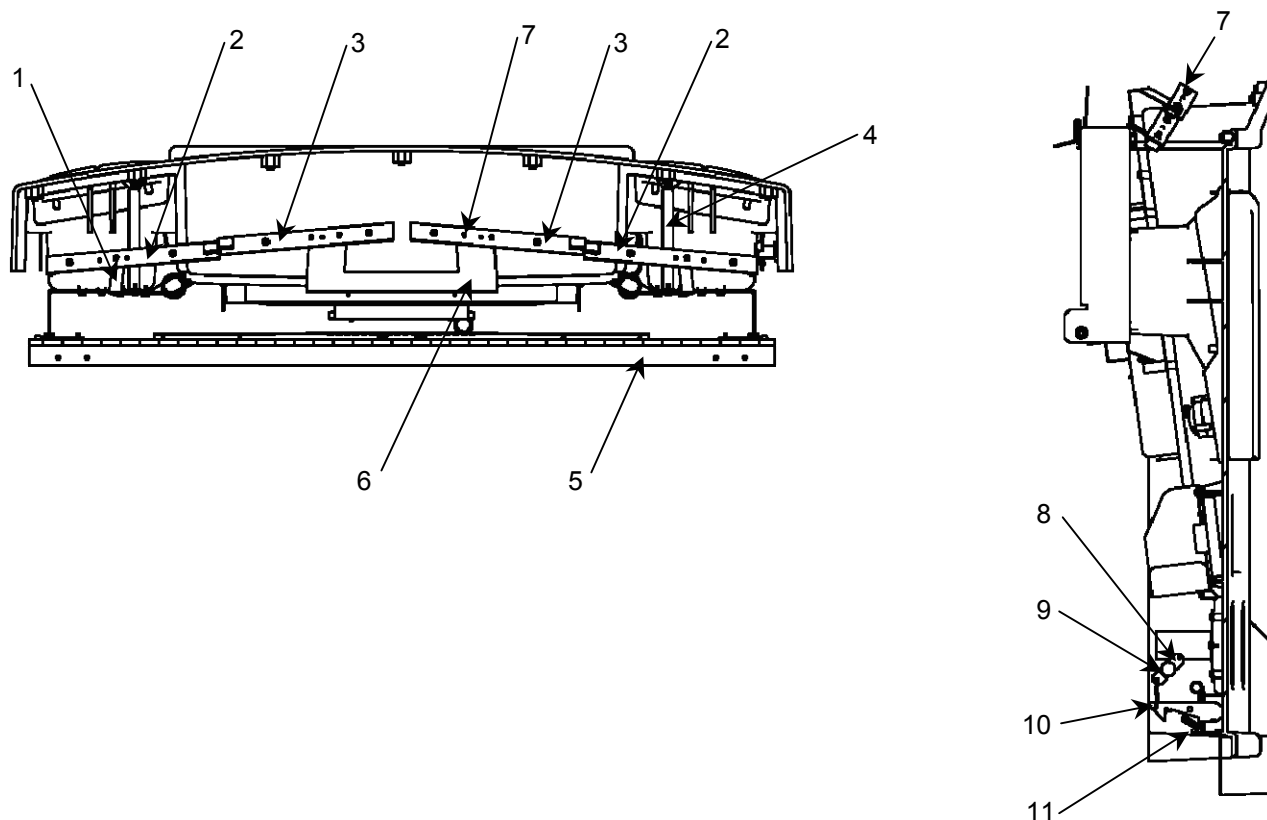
Top Door Assembly (Internal – Top and Side View)
